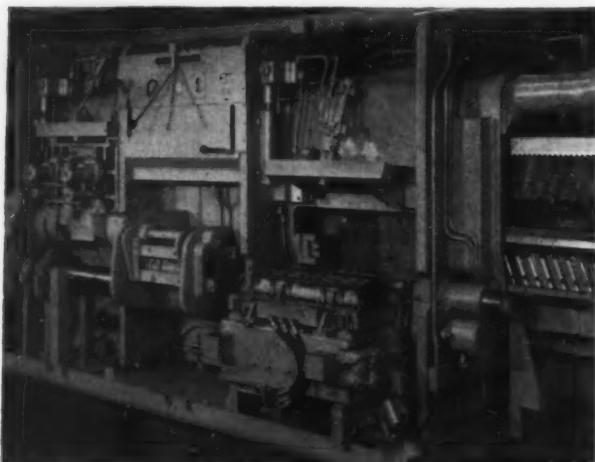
CLOSE-UP VIEW OF CYLINDER-HEAD BROACHING FIXTURES WITH FIRST OPERATION FIXTURE IN LOADING POSITION
